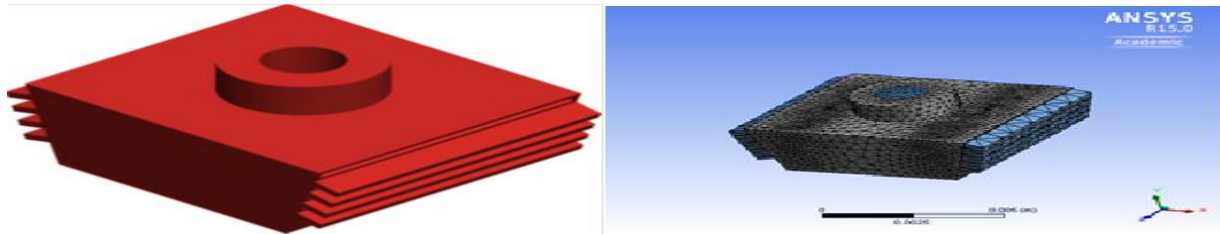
Cooling tower model in Pro-e and Meshing detail of cooling tower
